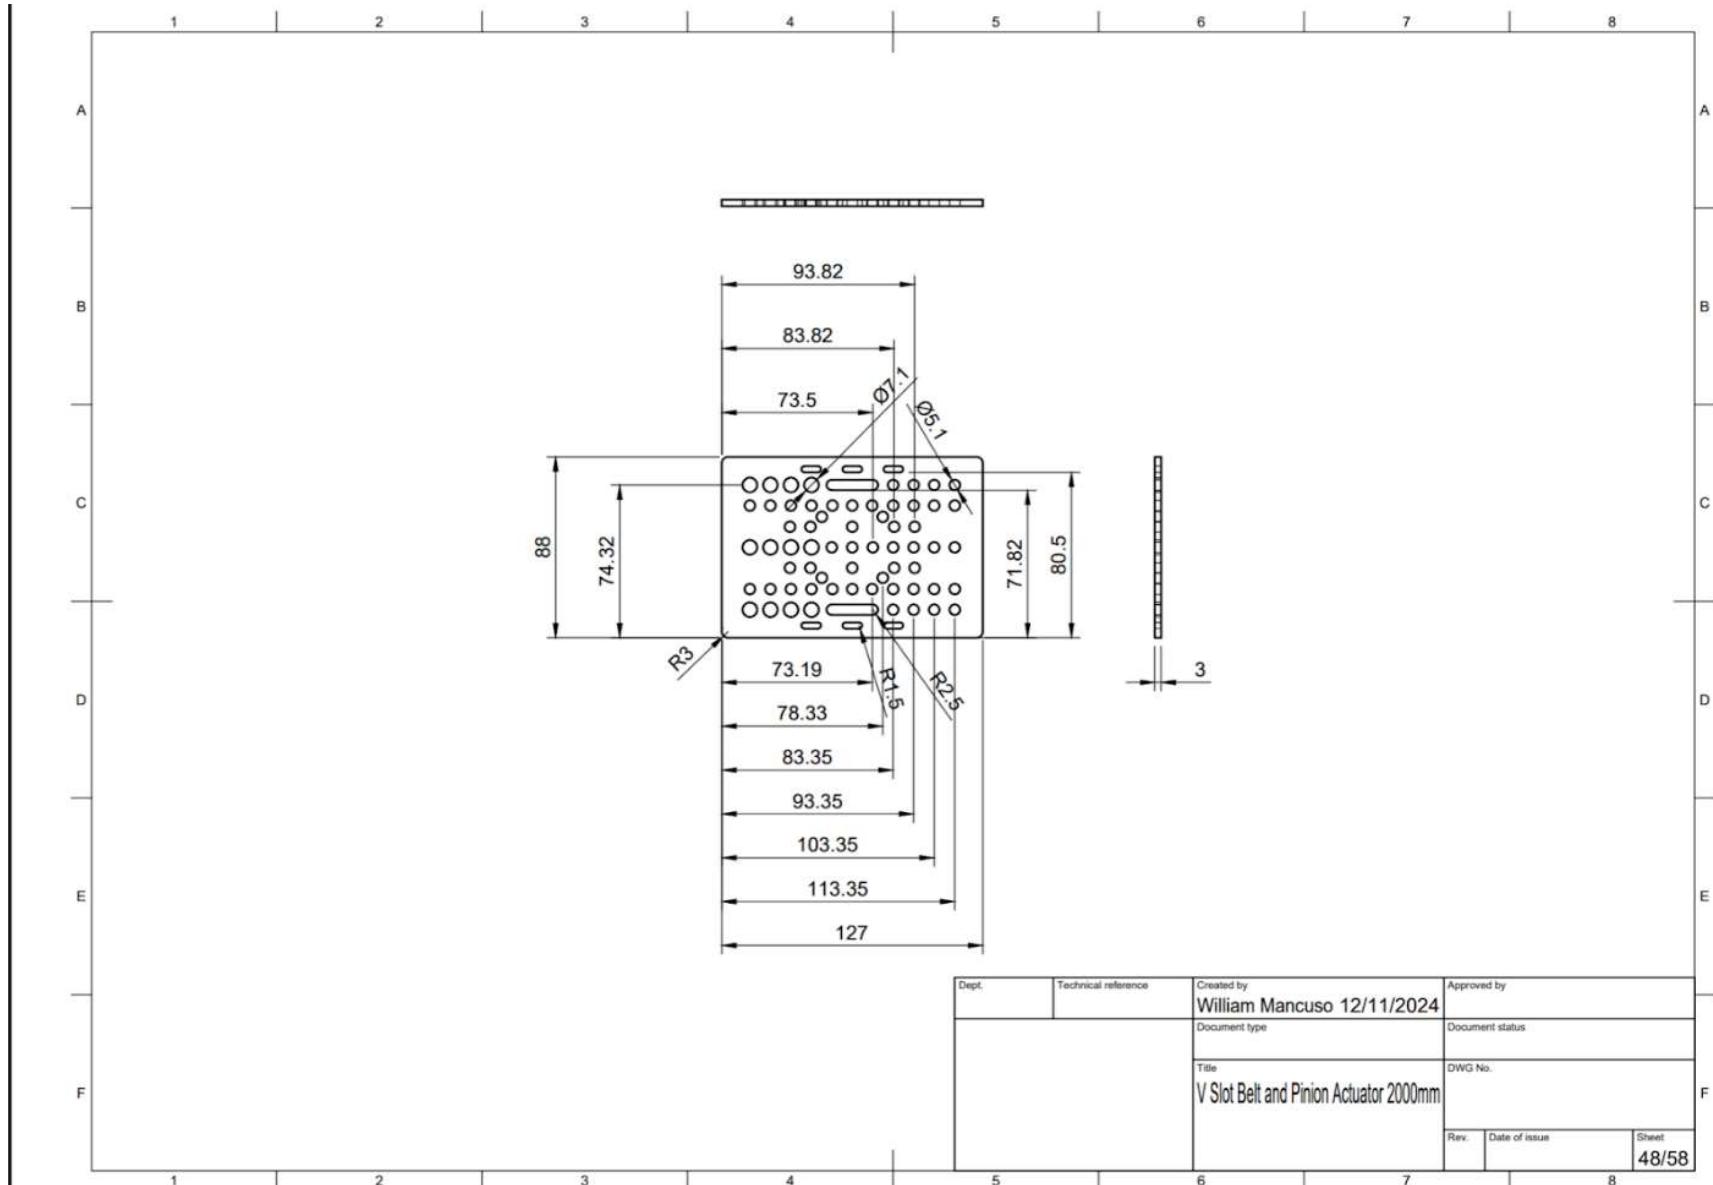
Manufacturing Drawing of part SS#2-P#6 – Main Gantry Plate
